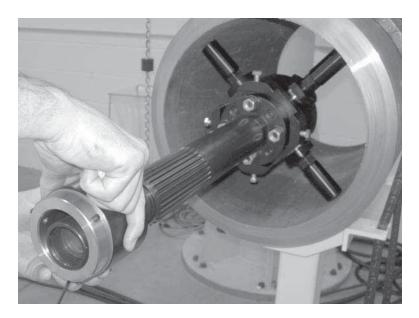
Slide the indicator collar over the end of the mandrel.
